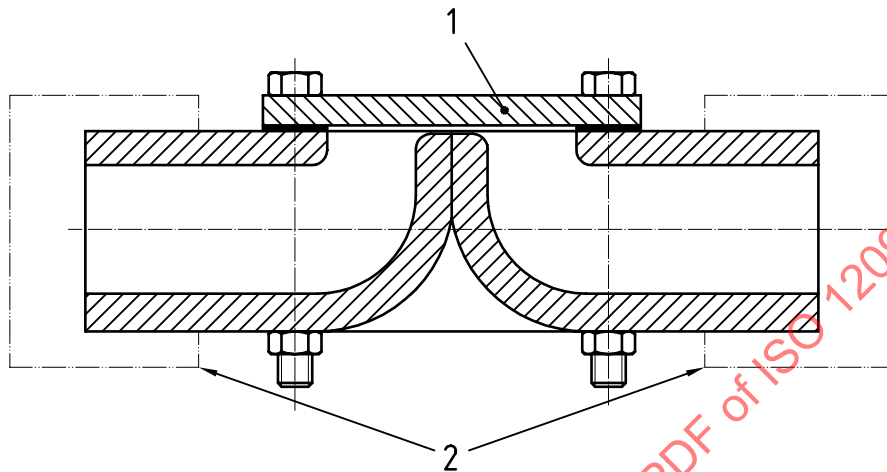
Example of a pressure-tight device using metal plugs and nuts on a ball valve body
